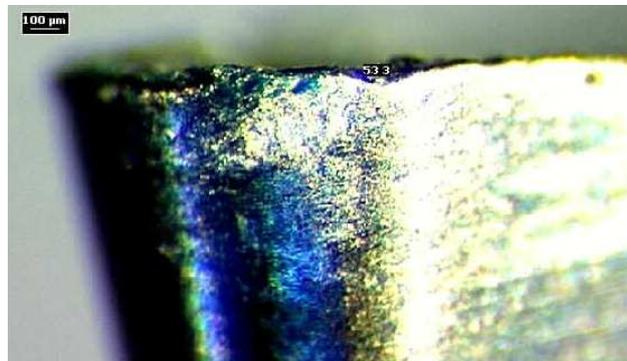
Tool flank wear appearance ($VB = 42 \text{ }\mu\text{m}$) at cutting speed of 100 m min^{-1} , feed rate of 0.2 mm rev^{-1} and depth of cut of 1.0 mm when length of cut reached 4050 mm
